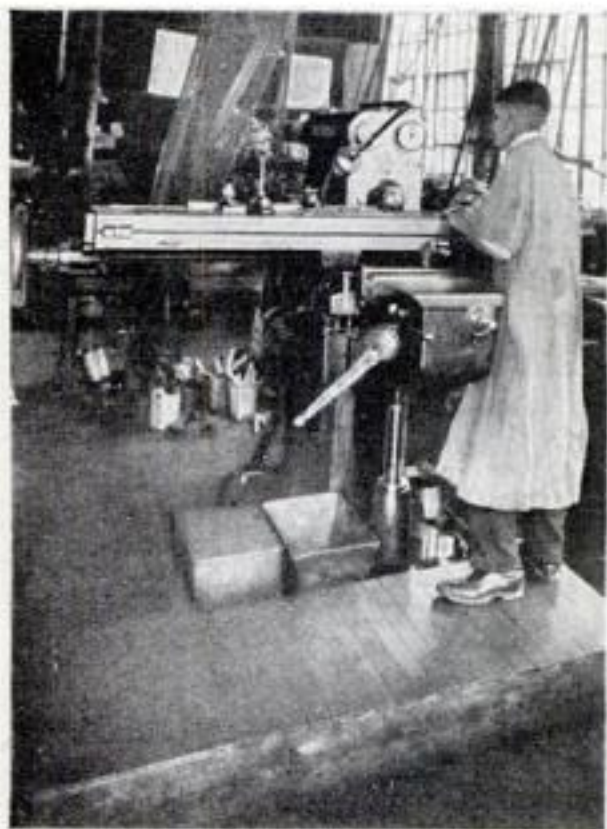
A floor platform before a machine or bench will often save a mechanic fatigue
